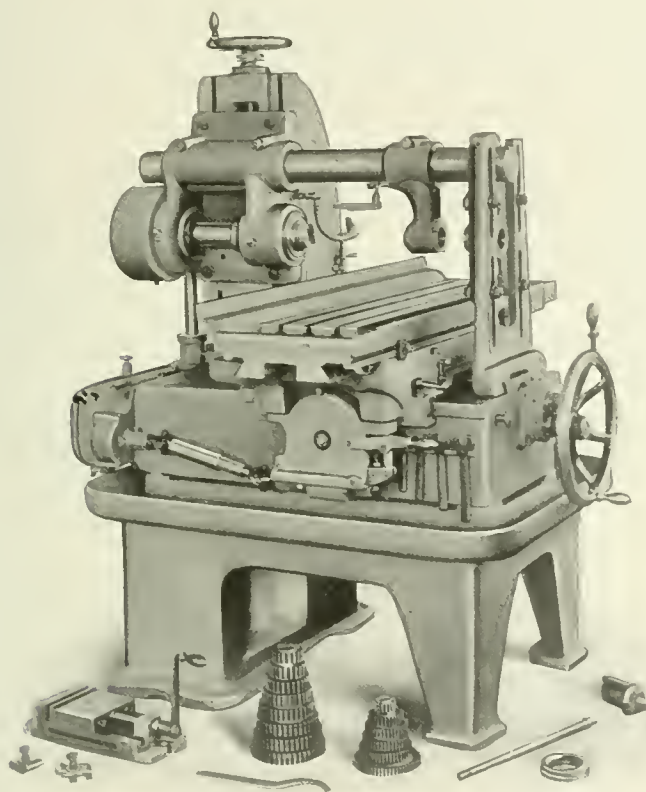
Brown & Sharpe 34-by-6-by-12-inch Plain Milling Machine
